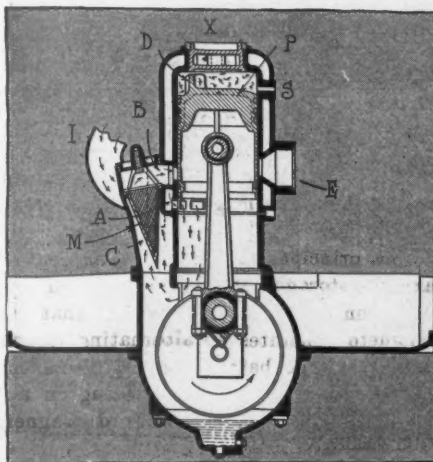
SECTIONAL VIEW OF AMPLEX MOTOR. PISTON AT TOP OF ITS STROKE
